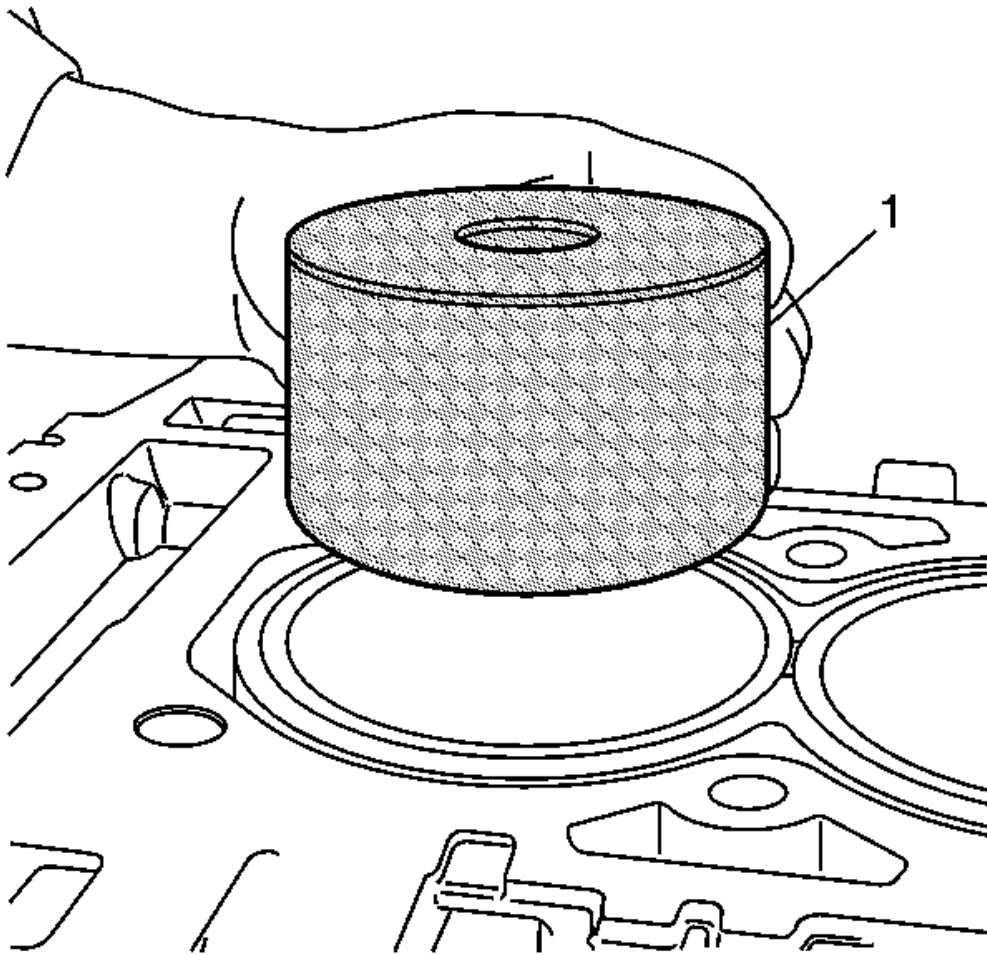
Place EN-45680-884 Metal Shaving Catch Plug Into Cylinder Bore Sleeve To Be Trimmed
